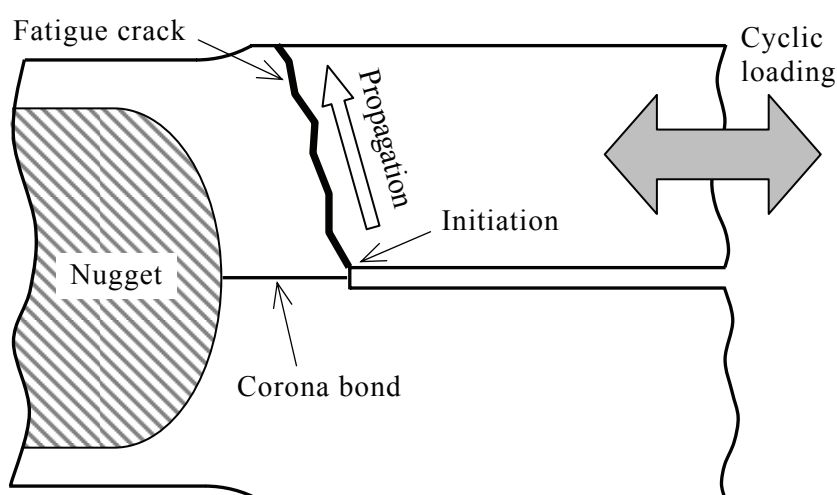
Schematic illustration of cross section of tensile-shear spot welded joint after fatigue test.
